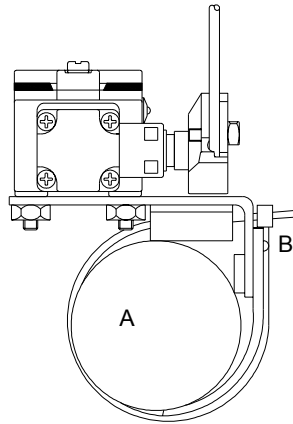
Lynx™ Mold-Closed Limit Switch front view
